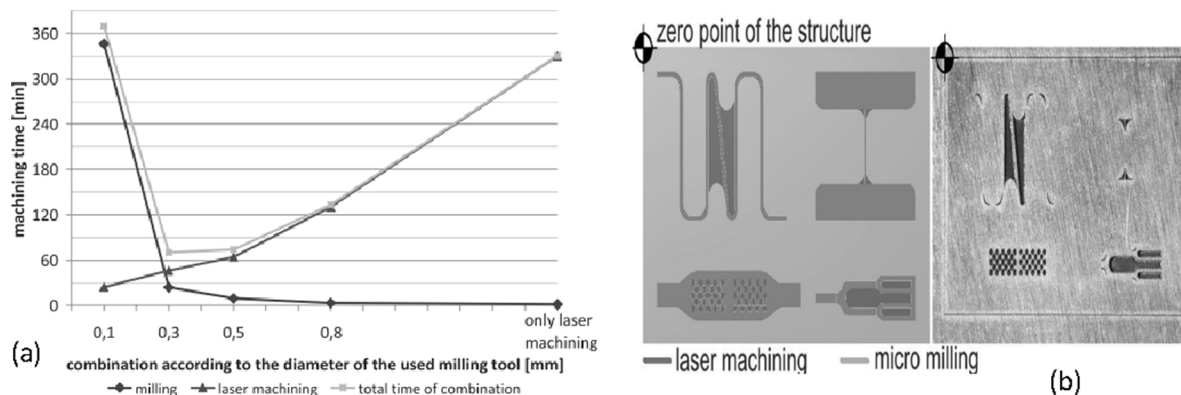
(a) Machining time in hybrid machining (b) 3D structure fabricated by sequential laser and conventional machining [137]. [Reproduced by permission of the publisher. Permission to reuse must be obtained from the rights holder].
